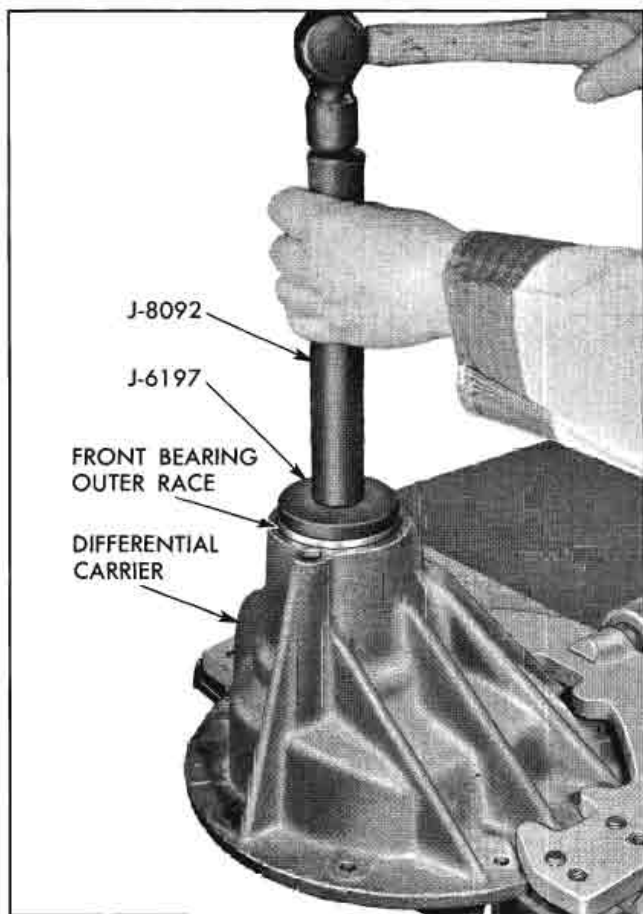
Installing Front Bearing Outer Race with J-6197 and J-8092
